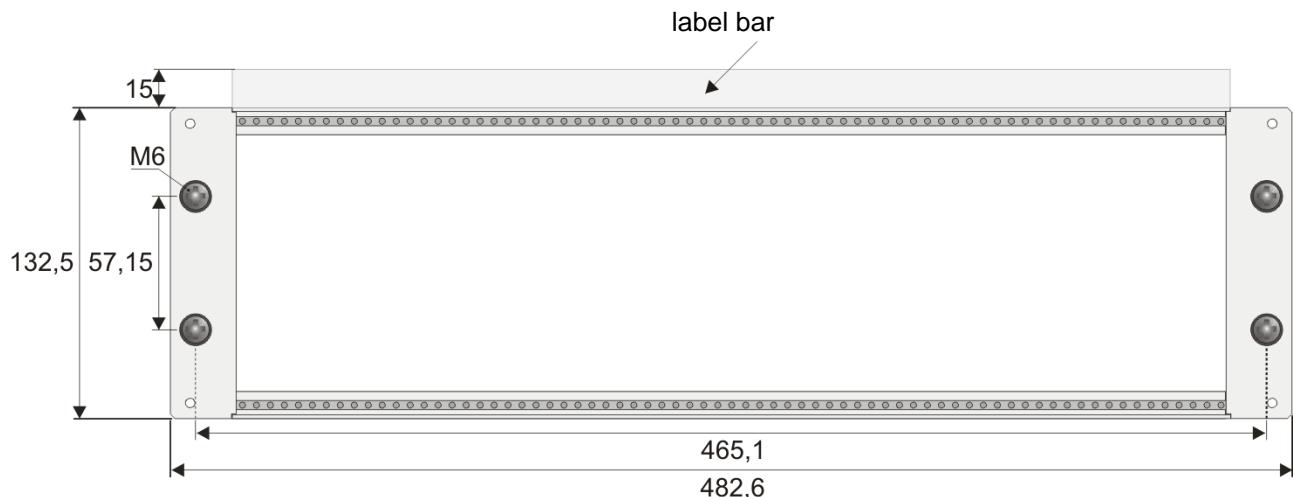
Front view of the board rack BGT07 with label bar, measurements in mm
